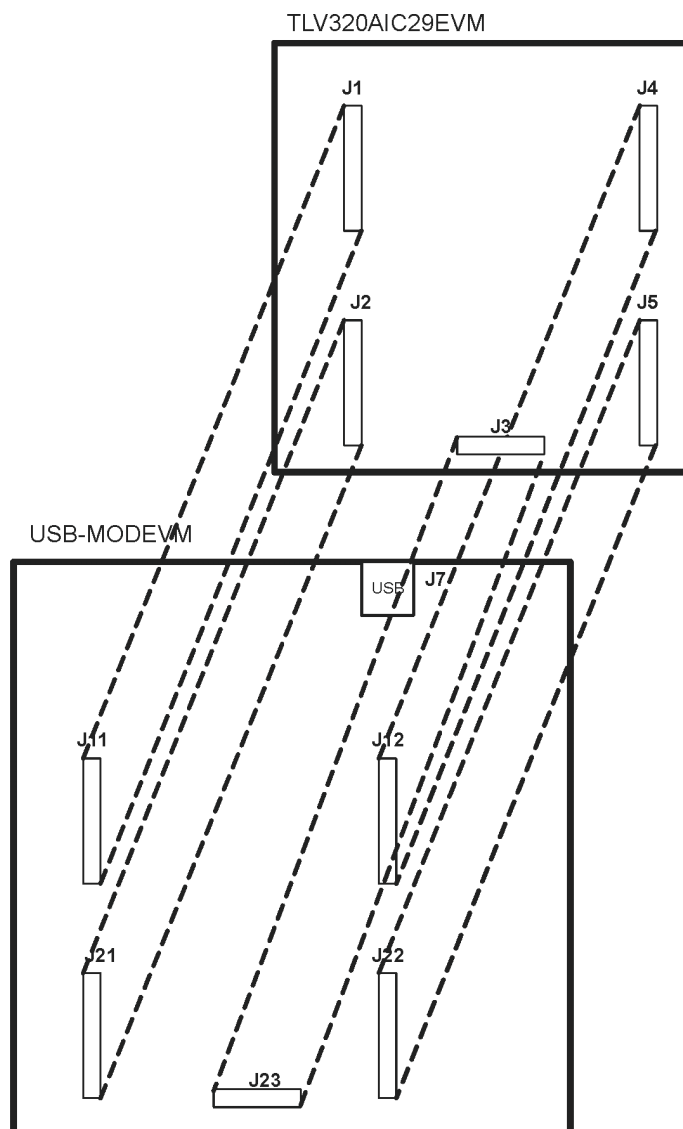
Mount TLV320AIC29EVM Board on Top of USBMODEVM Board
